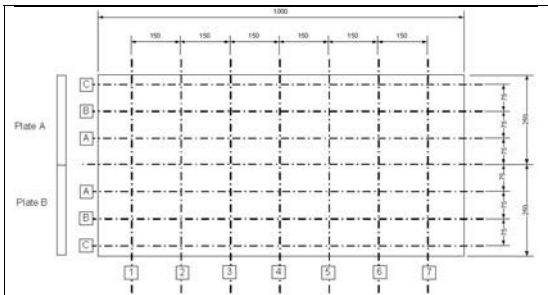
Location of measurement points used to assess distortion pre and post welded plates
